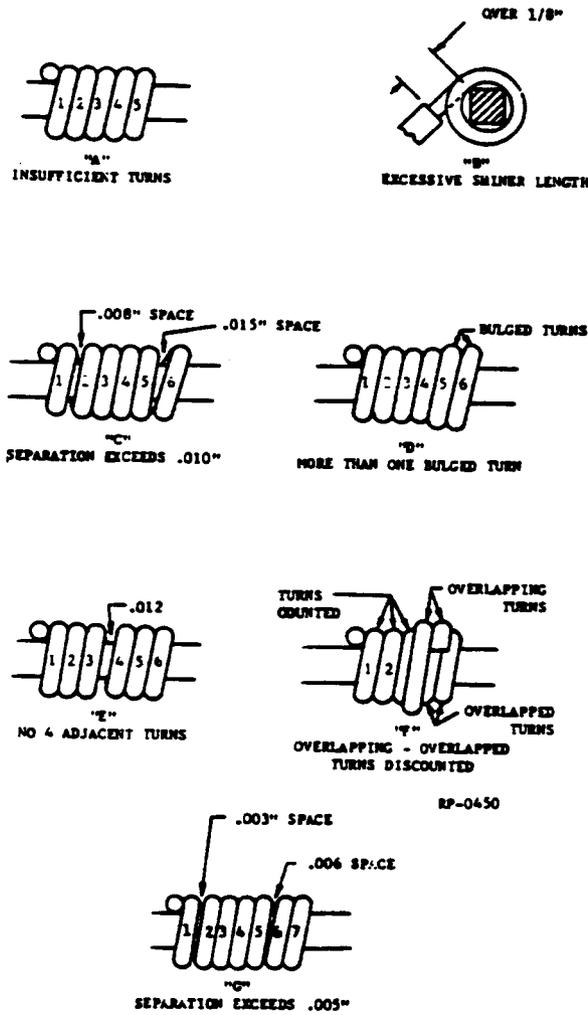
A SCALED SKETCH DEPICTING TYPICAL SOLDERLESS WRAPPED CONNECTION 24 GAUGE DEFECTS A THRU F, 28 GAUGE DEFECT SHOWN IN "G" (PARS. 3.211, 3.221, 3.231, 3.31, 3.41, 3.52, 4.151, 4.152)
